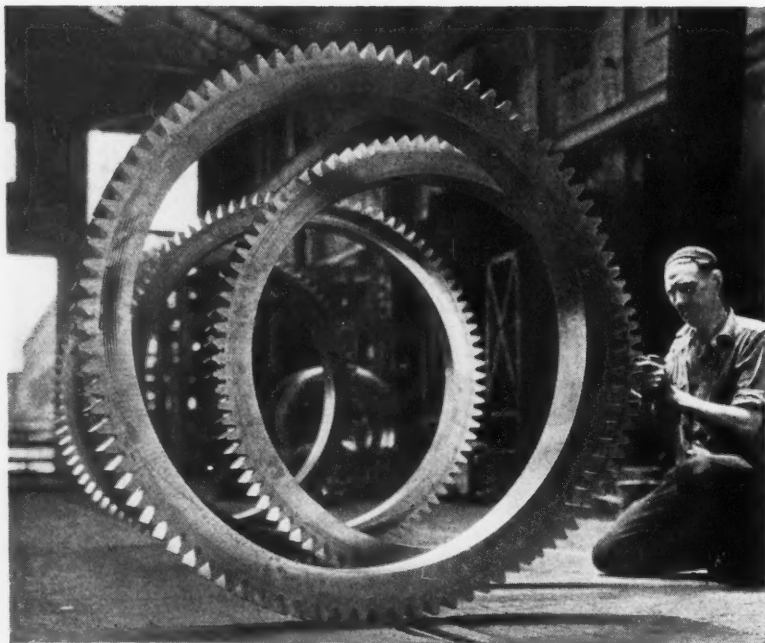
The Large Gears Here Shown were Ground in the Teeth to Insure the Smooth Driving of Huge Electric Locomotives
